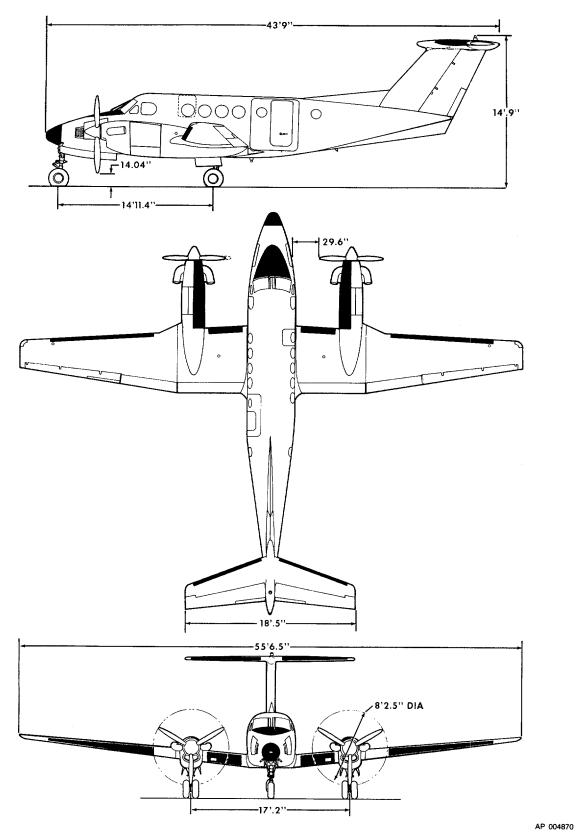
Principal Dimensions DF-Sheet 2 of 2
